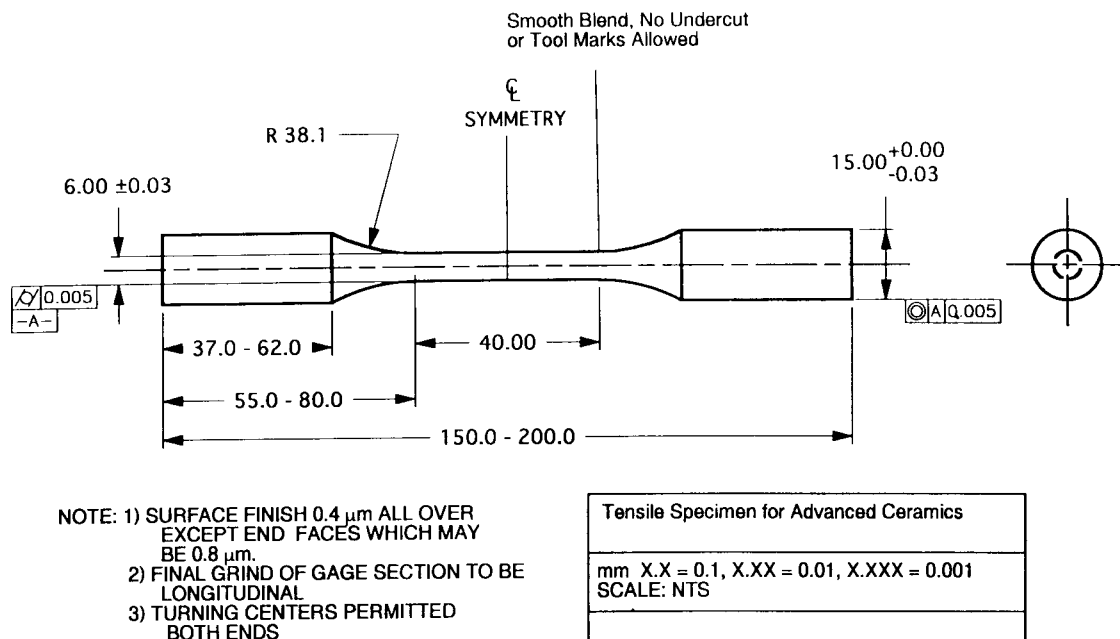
Example of a Cylindrical, Straight-Shank Tensile Specimen (8)
